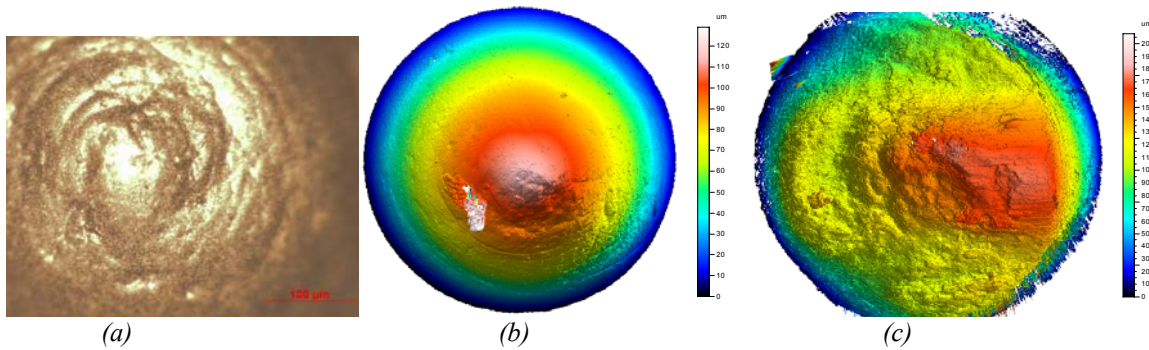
Contact surface pictures for DC 53 sample with TD coating (Sample # 6-3) before test obtained by (a) optical, (b) confocal microscope; (c) after test view of contact surface obtained by confocal microscope
